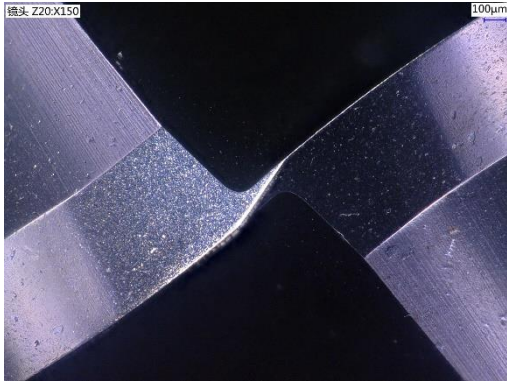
Tool Corner Slight Wear After 19 Hours of Machining
